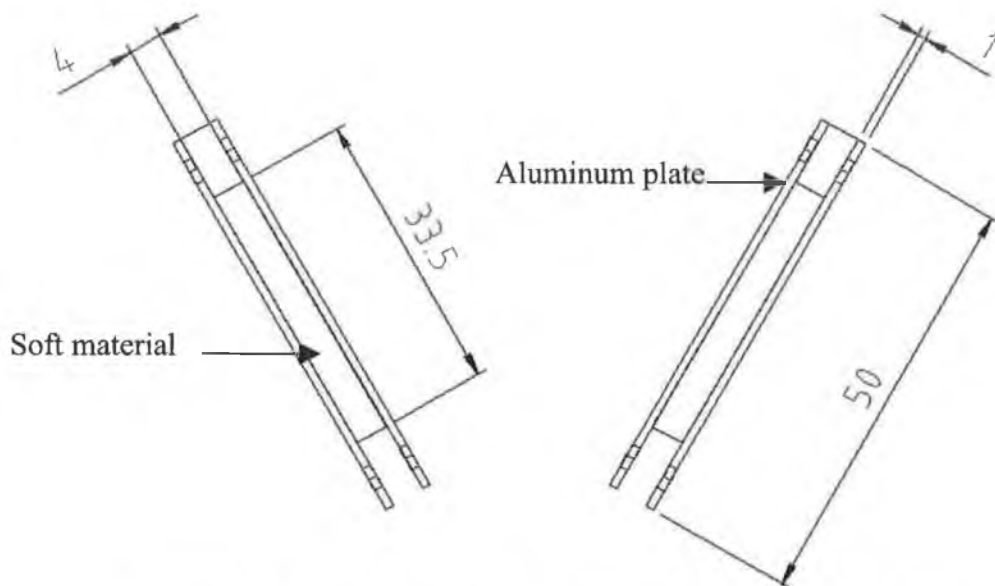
Dimensions (mm) of the early fibre optical holder.
